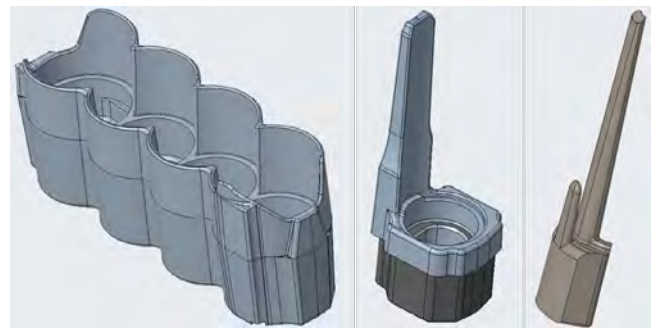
Examples of die inserts that require diamond polishing prior to PVD coating (water jacket and two blade inserts).
